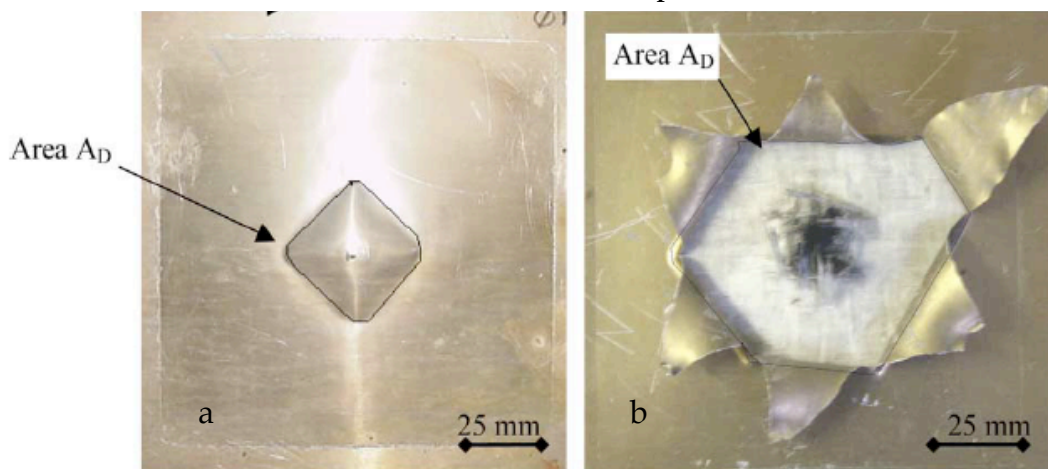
Debonding (a) and spalling/petalling (b) of the rear surface aluminium layer [29]
